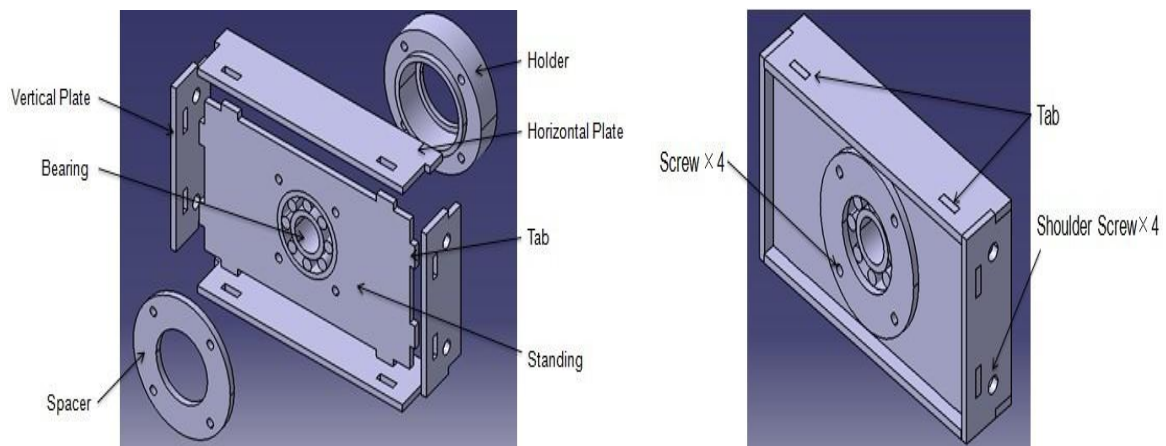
Parts of the Bearing Box (Left); Assembled Model (Right)
